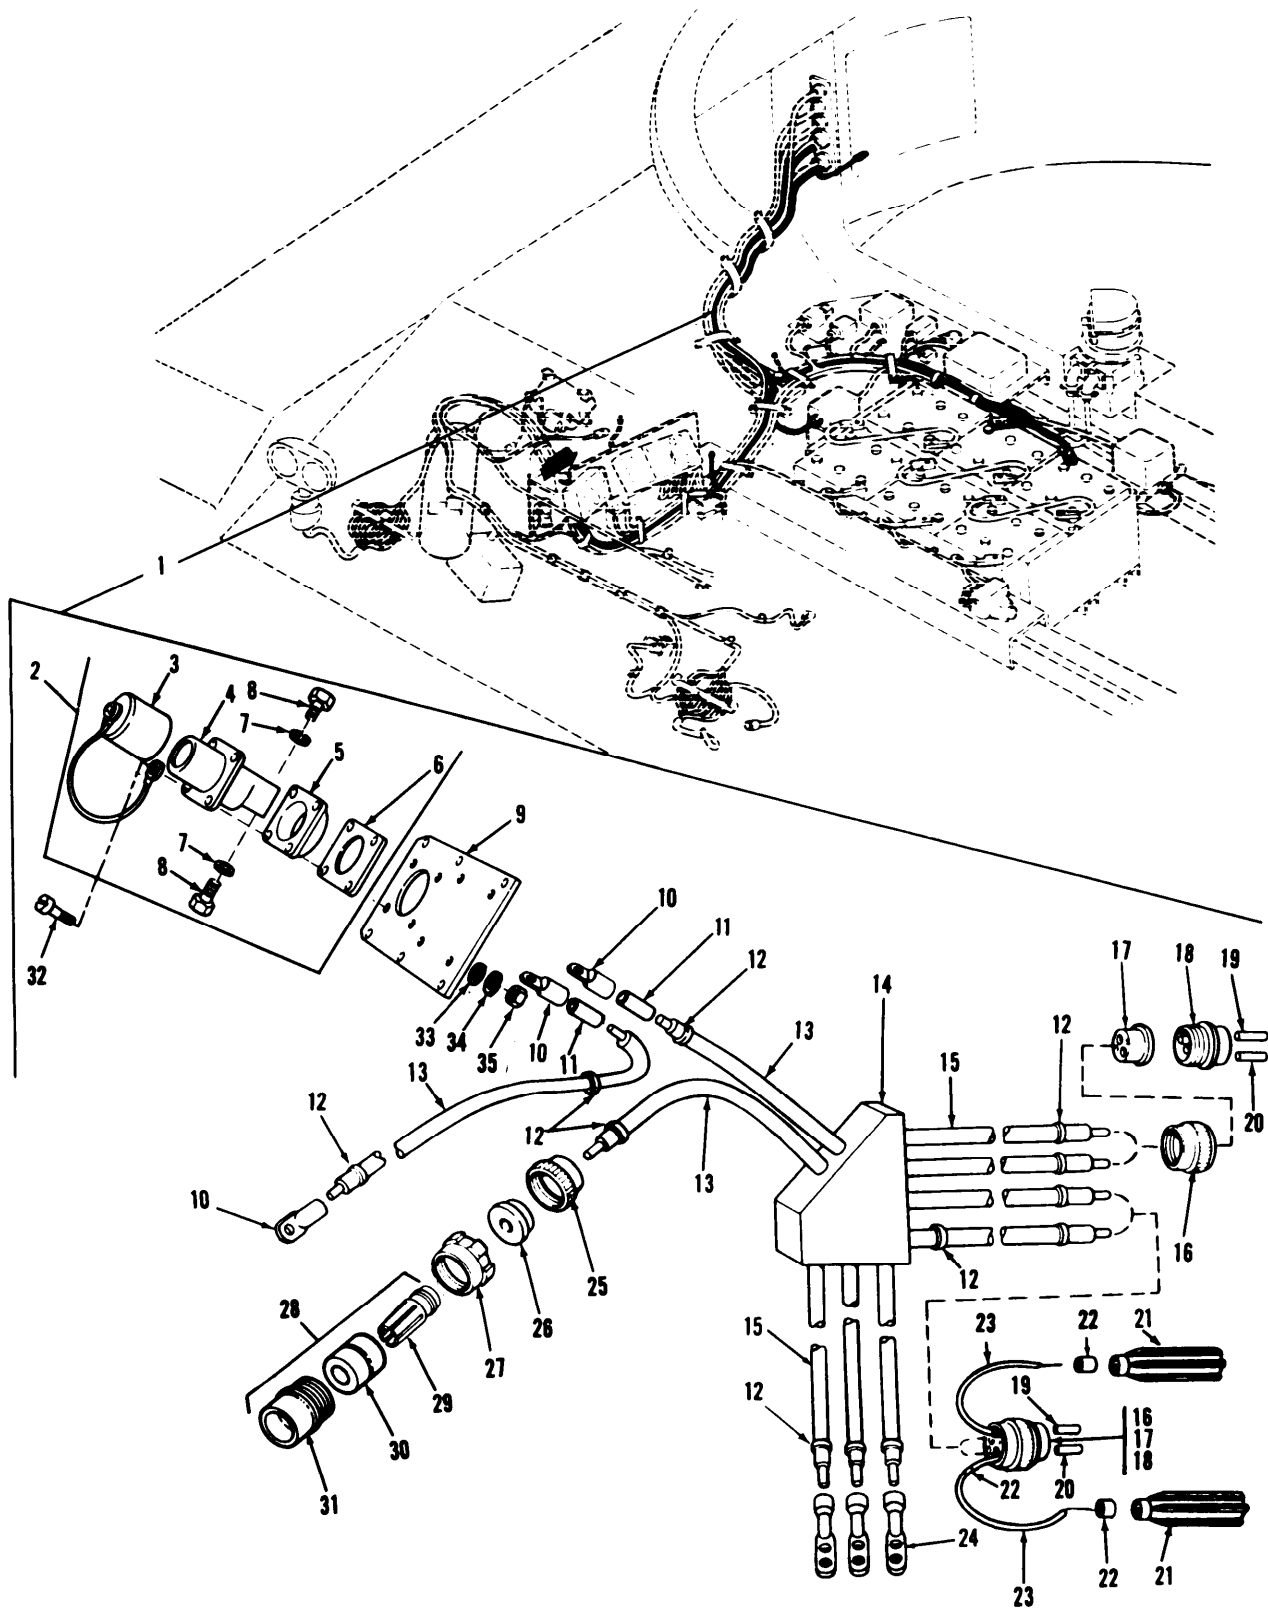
BATTERY SLAVE AND STARTER RELAY CABLE ASSEMBLY
